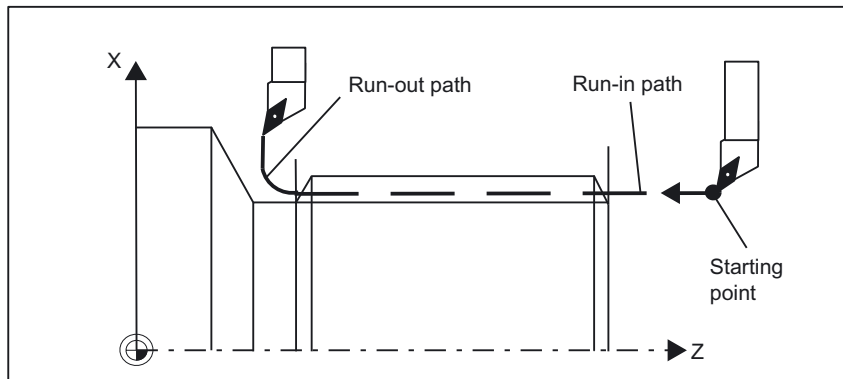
Run-in path and run-out path with corner rounding for thread G33
